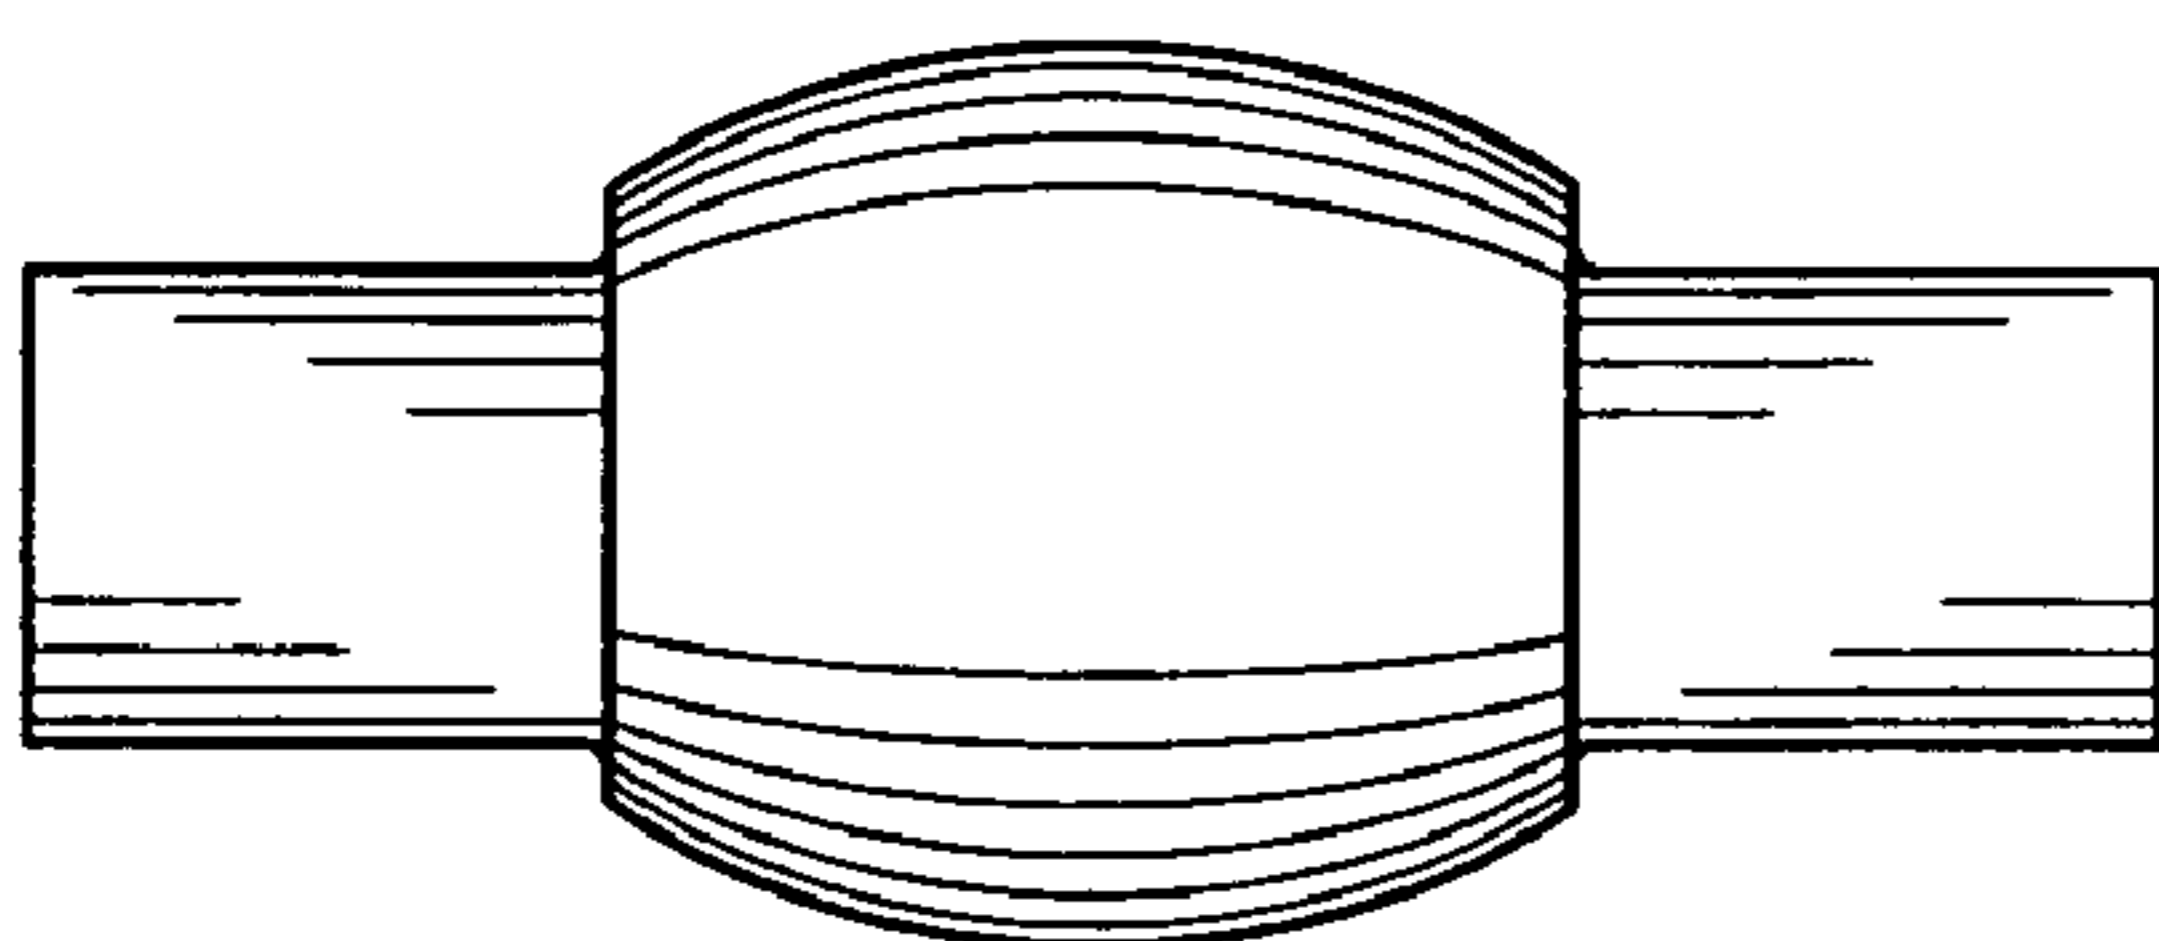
is schematic perspective view of the elliptical bearing with a rod end ghosted in.
